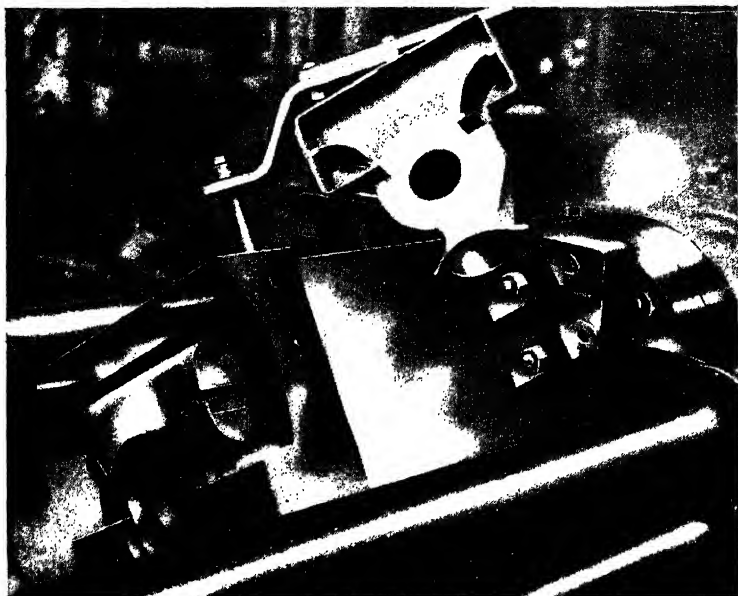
Moveable half mould, showing also the aluminium alloy pressure die-casting
